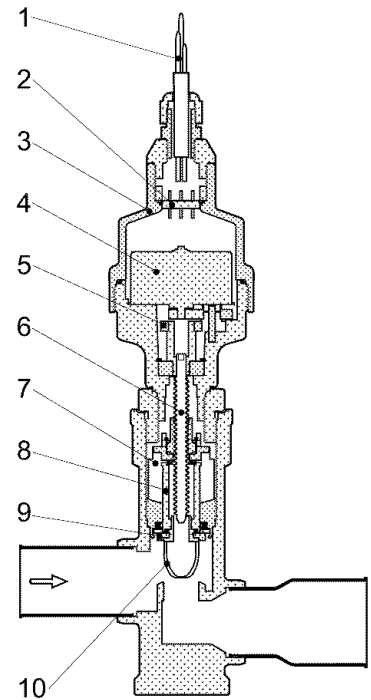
Cutaway Views of the Electronic Expansion Valve
